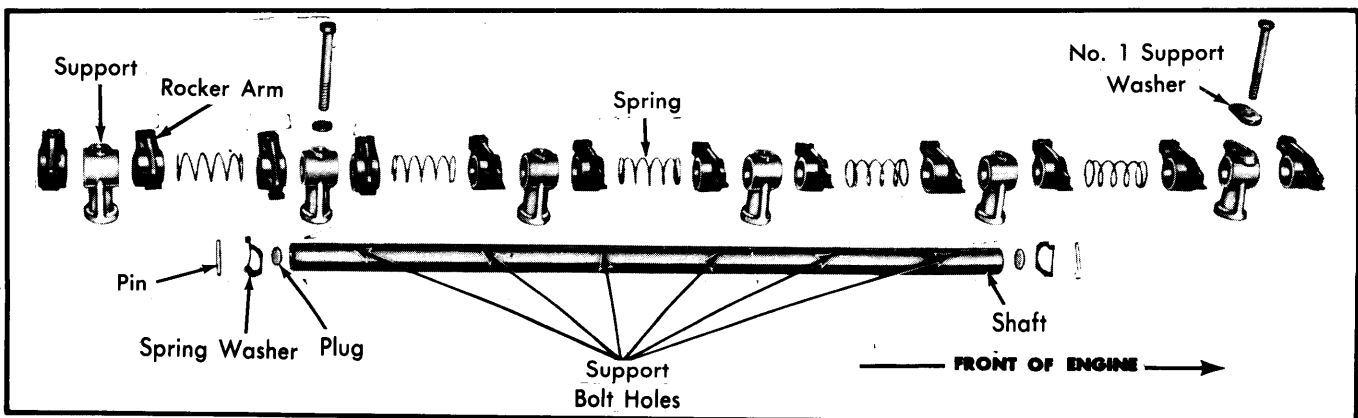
Exploded View of Rocker Arm and Rocker Shaft Assembly
